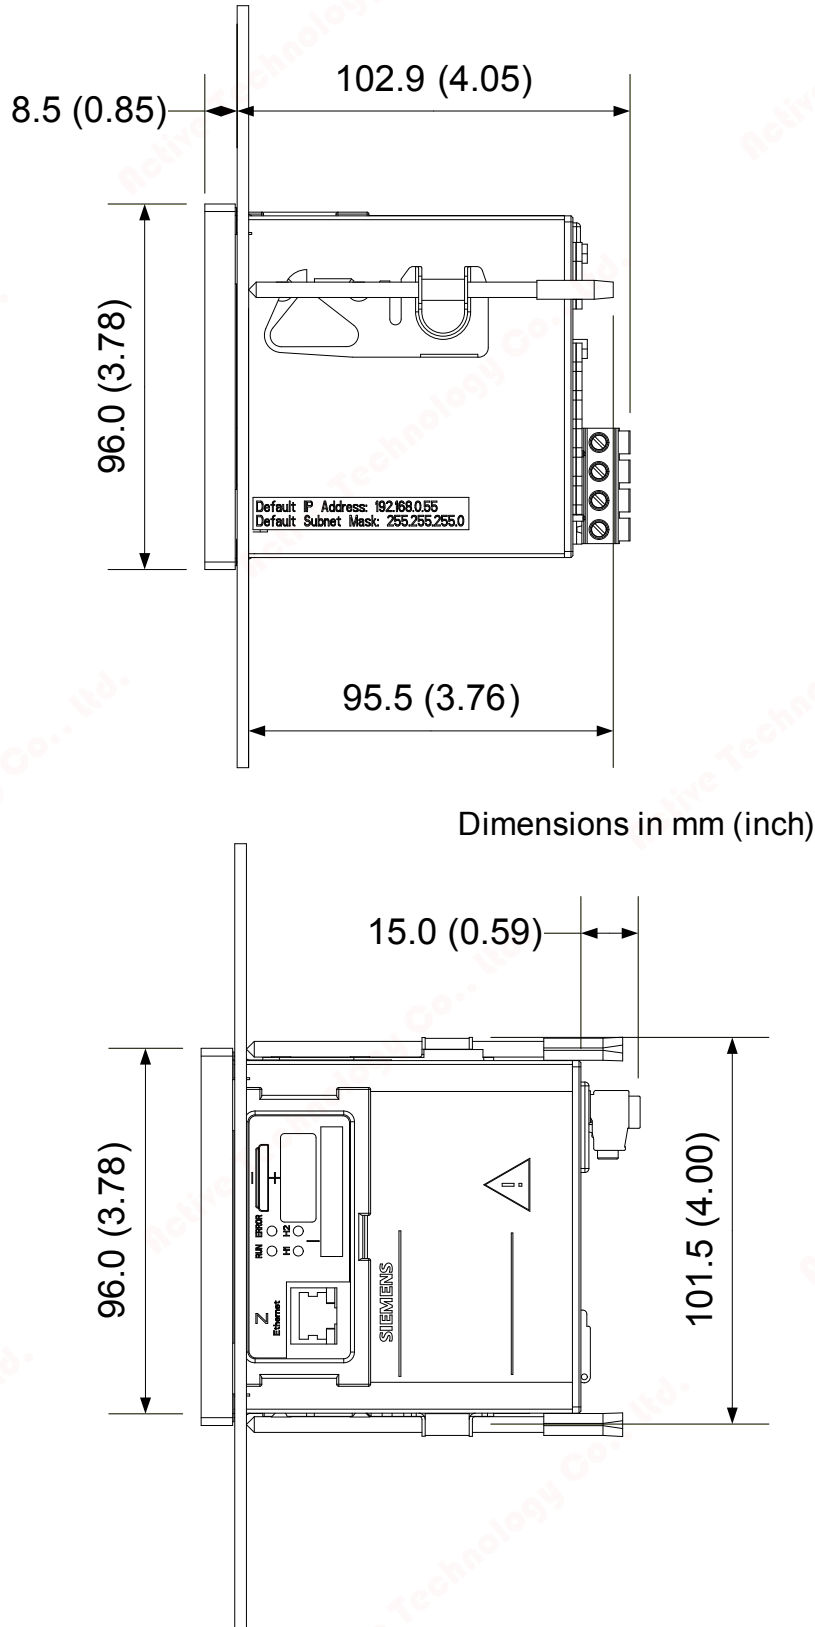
Dimensional Drawing of SENTRON PAC5100/5200 with Display
